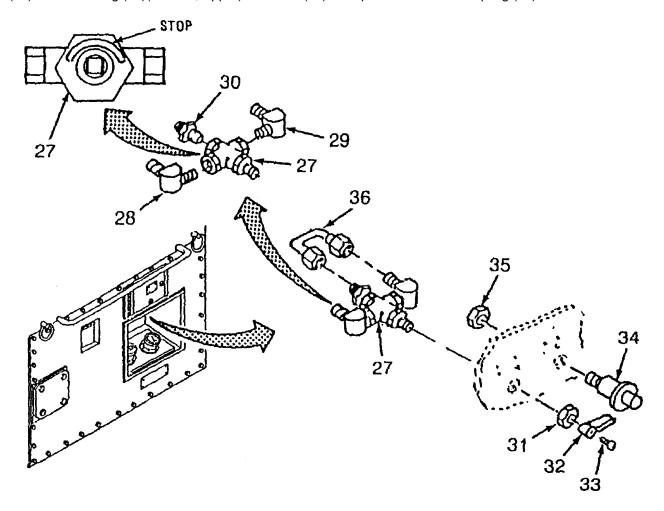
Rear Panel Assembly (Sheet 3 of 3)
